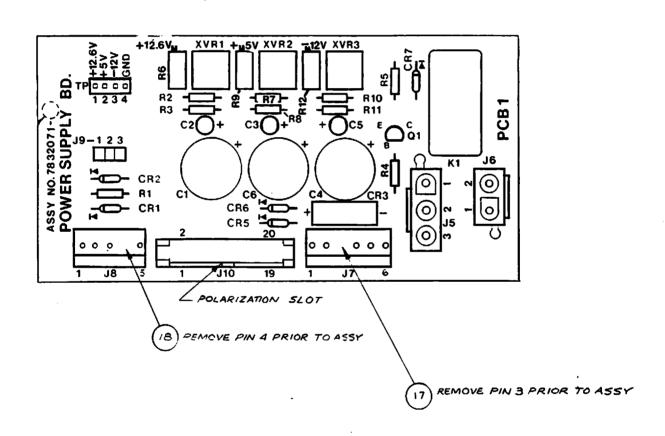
POWER MODULE POWER SUPPLY BOARD PCB1 PARTS LOCATION DIAGRAM
